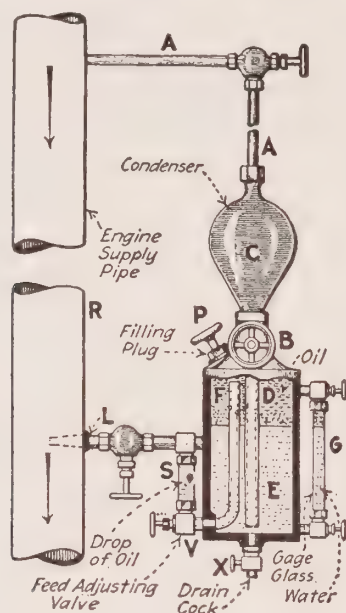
Engine Cylinder Sight Feed Lubricator.
